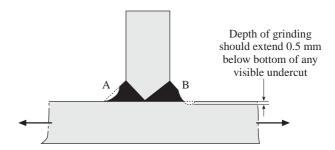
Grinding of the weld toe tangential to the plate surface, (as at A) will produce only limited improvement in the fatigue strength. The grinding must extend below the plate surface, (as at B) in order to remove toe defects.
